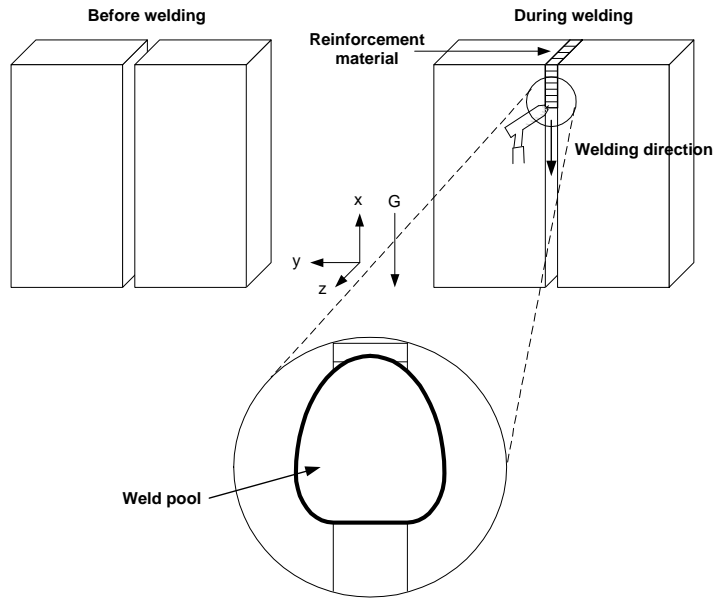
Sketch of a vertical falling I-joint GMA welding situation of 3 mm sheets, which is conducted in a single pass. The front of the weld pool is sketched as a straight line. This is due to the implementation of material addition where the new material is added as rectangular blocks.
